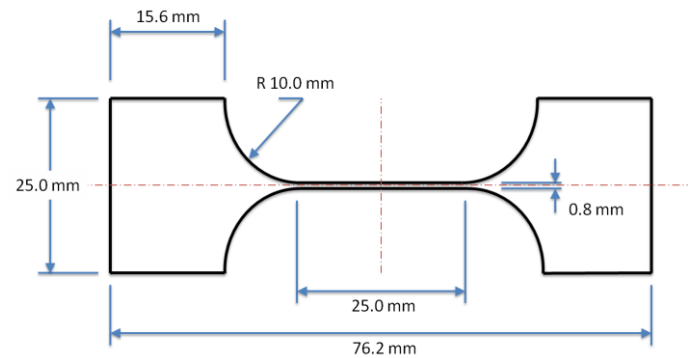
CAD drawing showing the Strip Specimen Profile Dimensions (inch).
